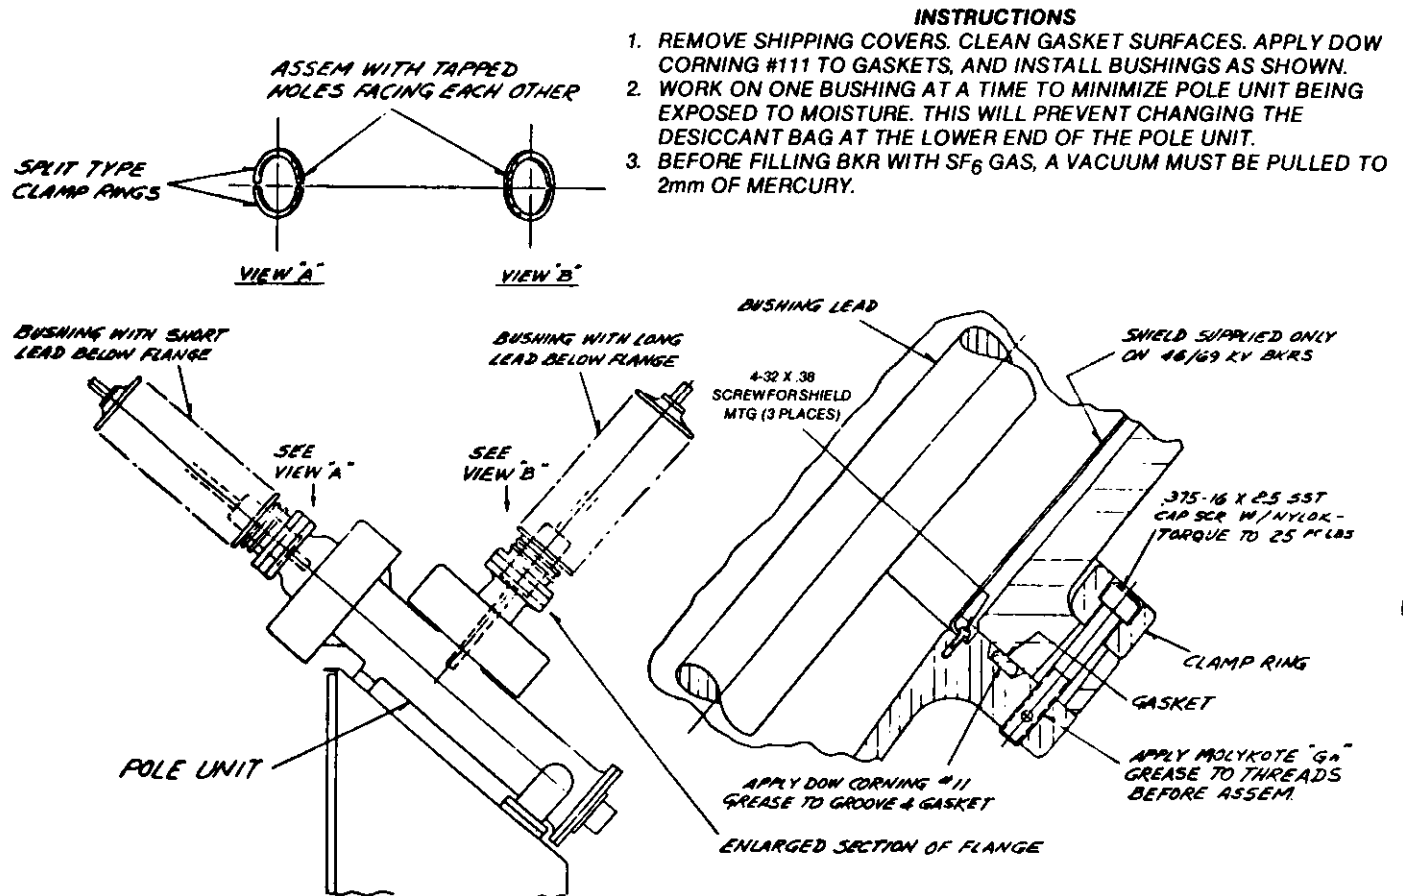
Breaker Shipped Knocked Down — Bushings Removed Only.
